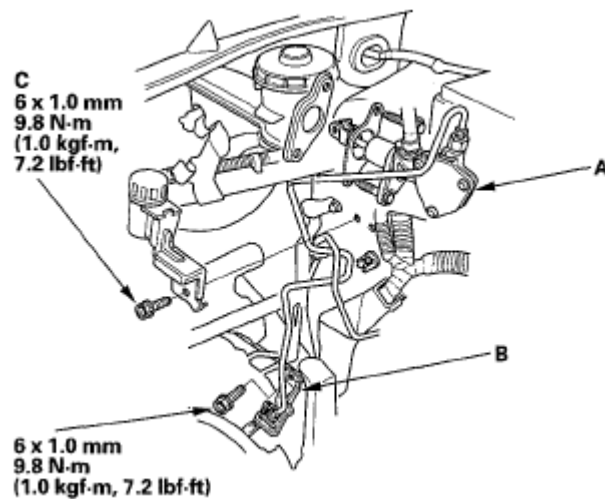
Identifying Clutch Master Cylinder With Torque Specifications
